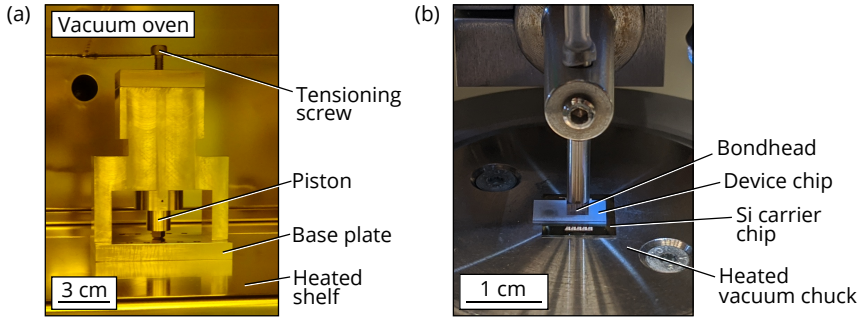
Picture of (a) the used bonding fixture in a vacuum oven and (b) the flip-chip die bonder.
